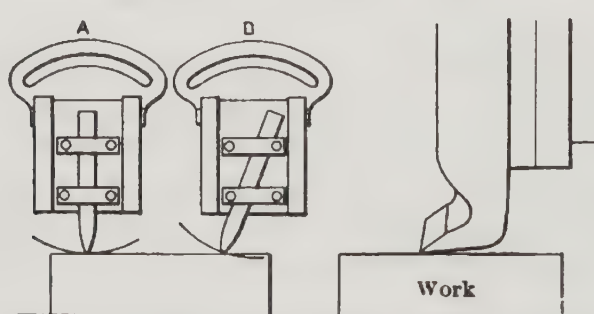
Method of Setting Tool with Proper Clearance and at Right Angles to the Work.
